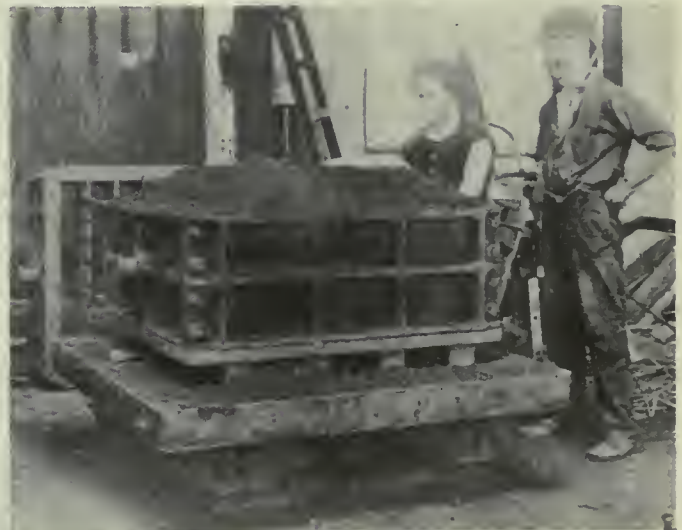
AMERICAN PNEUMATIC MOULDING MACHINE DEVELOPED AT ZENLENOLE, PA.
